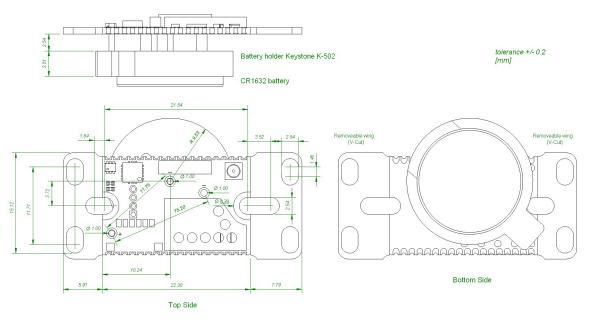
cB-OLx425 dimensions with mounting wings (optional) and CR1632 battery holder.
